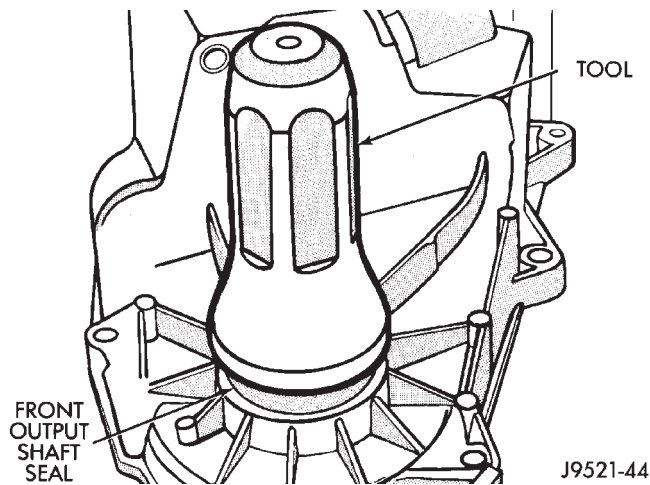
Starting Front Output Shaft Seal Into Case Bore
